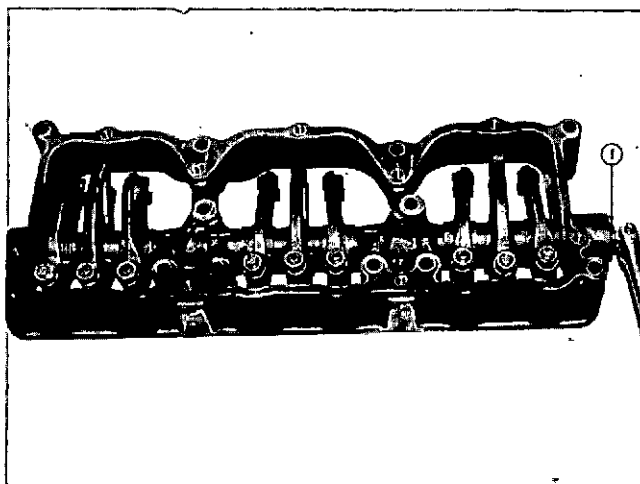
, V40302. Removing shaft retaining pipe plug
